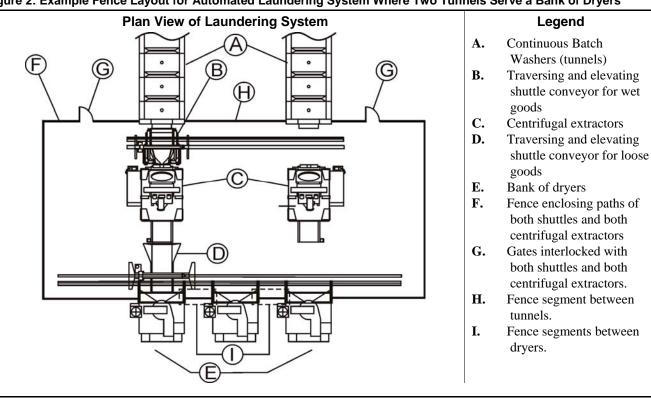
Example Fence Layout for Automated Laundering System Where Two Tunnels Serve a Bank of Dryers
